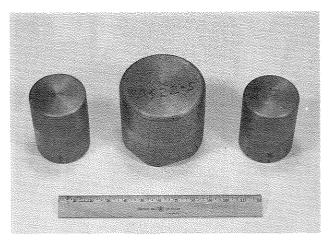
Sintered tungsten forging billets formed by powder metallurgy techniques.
